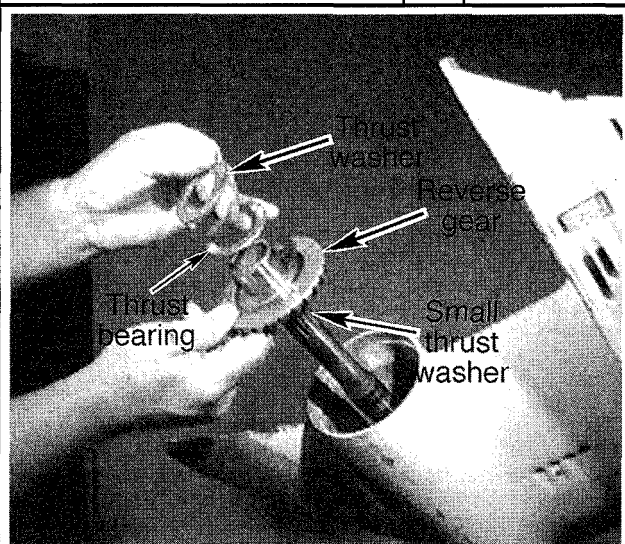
Install the reverse gear, thrust bearing and thrust washer (some models also use a small thrust washer in the front face of the reverse gear)
